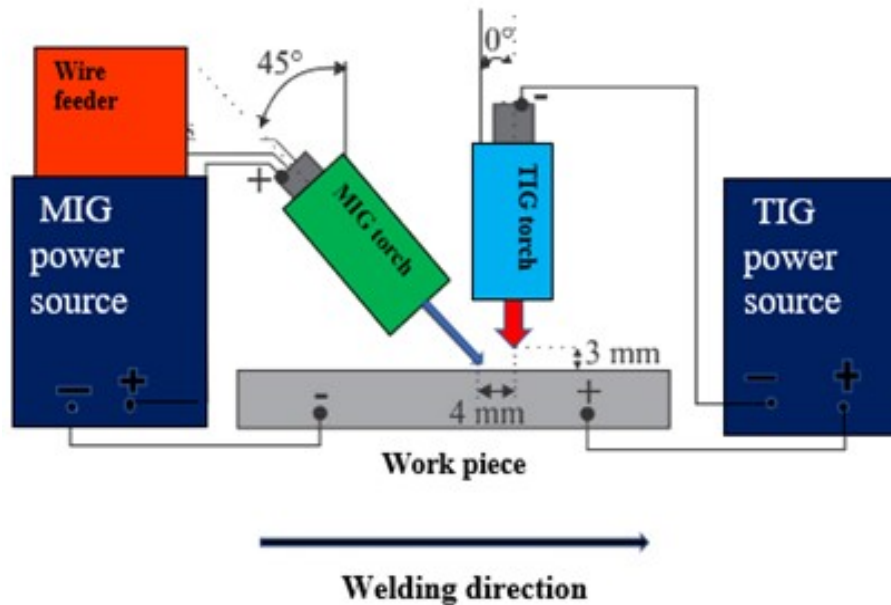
TIG-MIG welding schematic representation [5]
